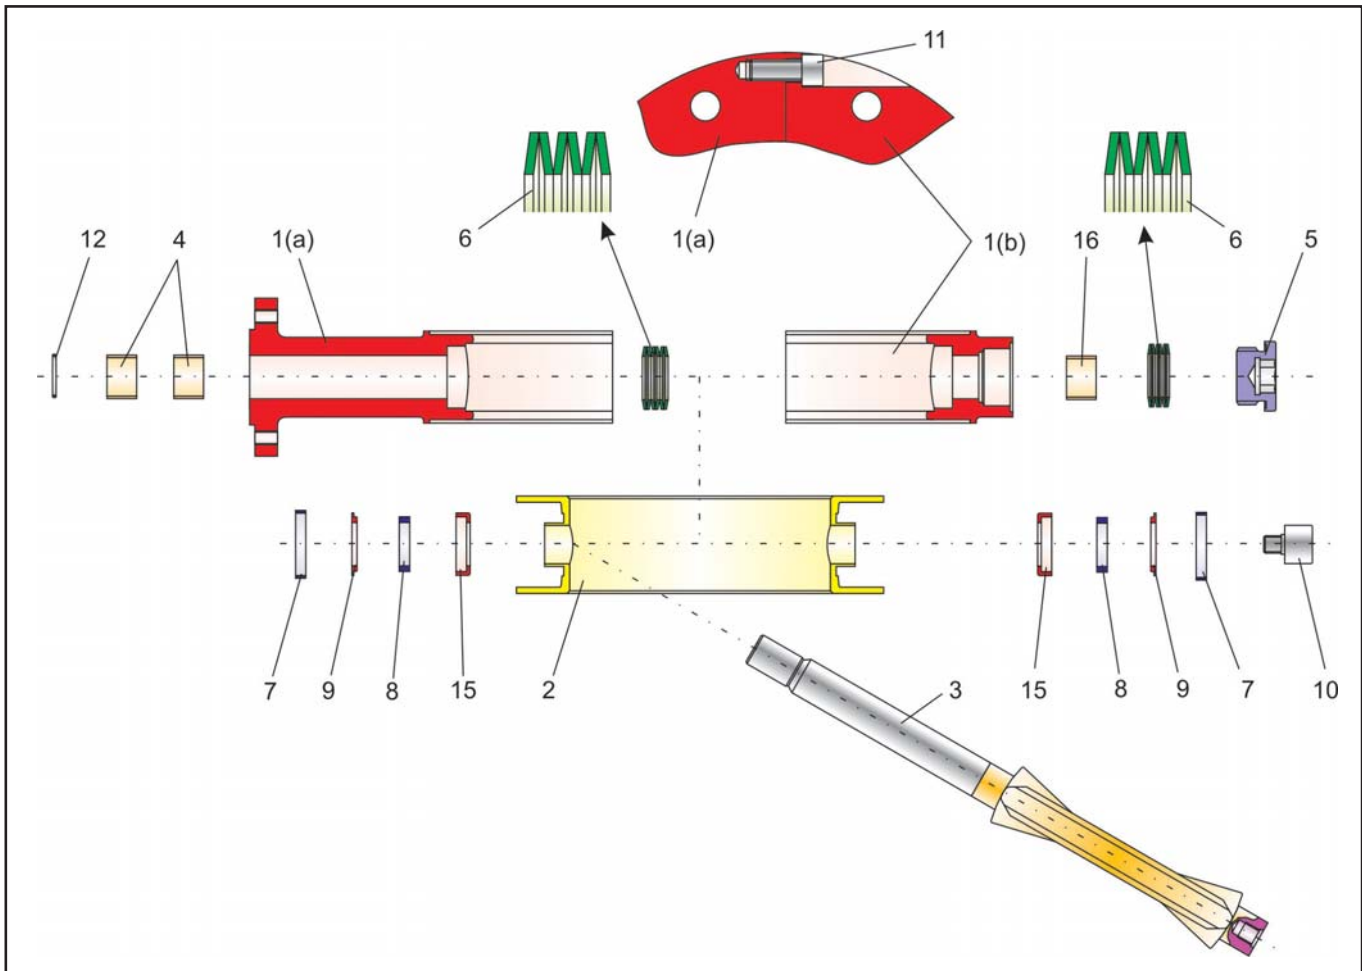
Exploded view of the Series 10e Control Butterfly Valve
